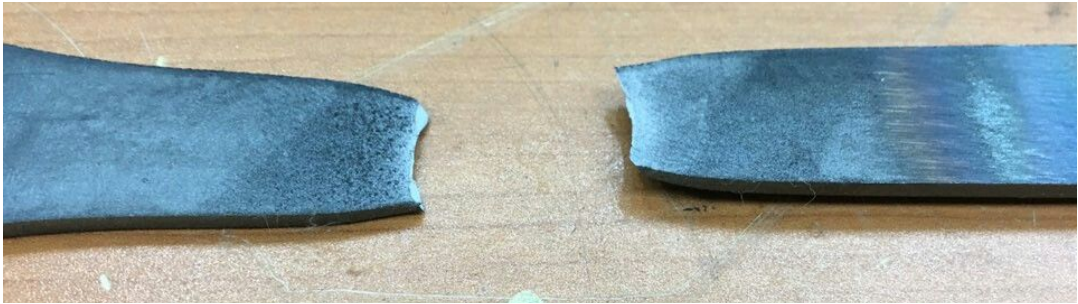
Tensile fracture surface of STS304-SS400
